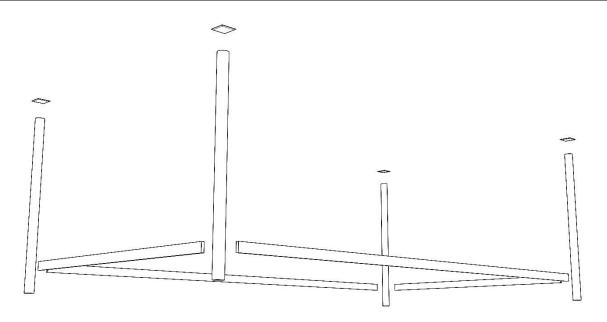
(WELDING THE BASE FOR THE SUPPORT, ADDING THE LEGS)
